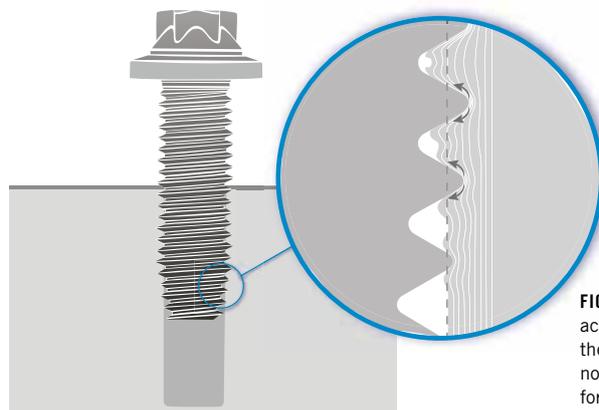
A thread-forming screw in action: In contrast to thread cutting, the material for the female thread is not cut away, but formed and therefore strain-hardened (© b&m)
